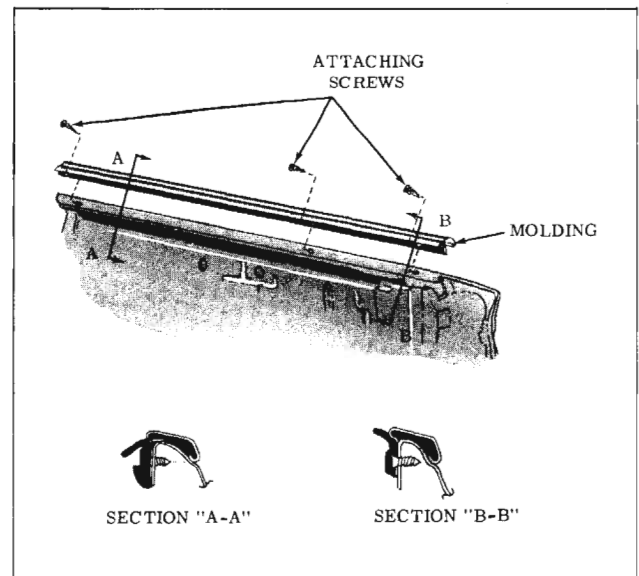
Run Channel Outer Strip with a Belt Reveal Molding
